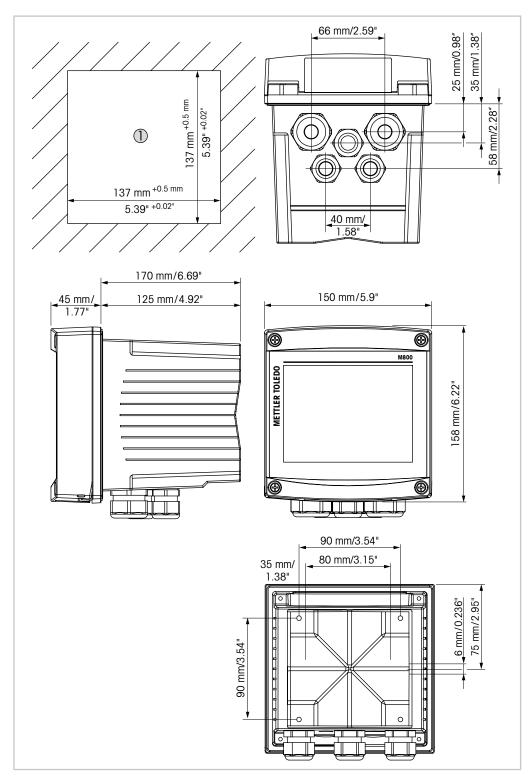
Dimensions 1/2 DIN version (PC housing)
